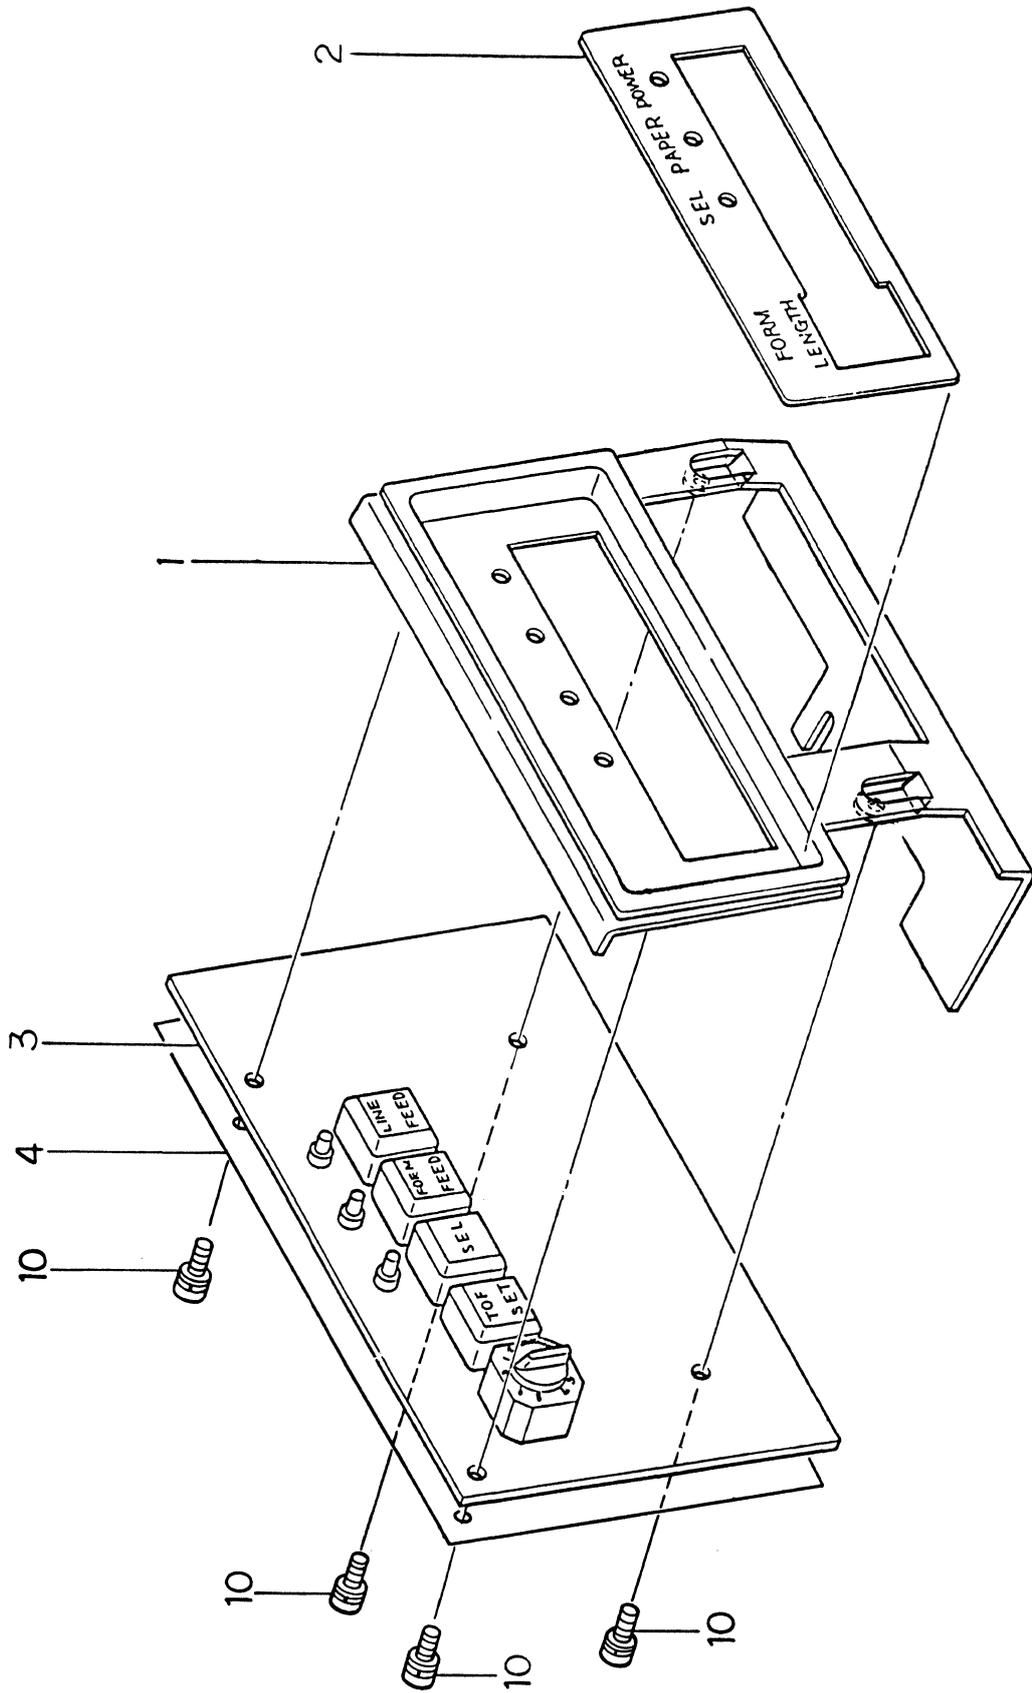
Operation Panel Assembly (IM-59688-1)
